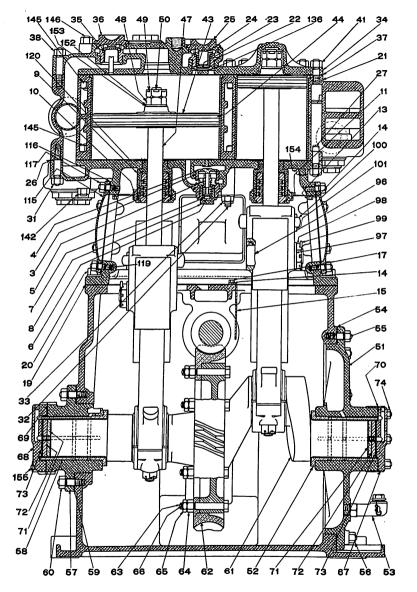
CA-150 Compressor, Section through Air Cylinders and Crank Shaft Main Bearings
